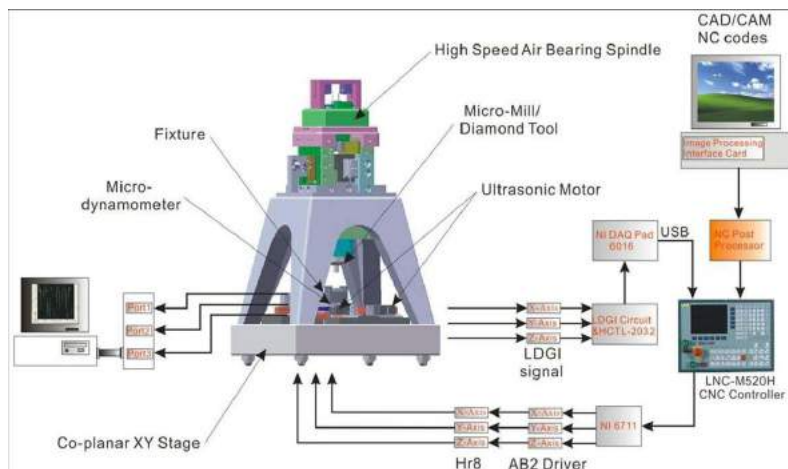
Schematic of the Meso-scale 3-axis milling machine tool and control system.
